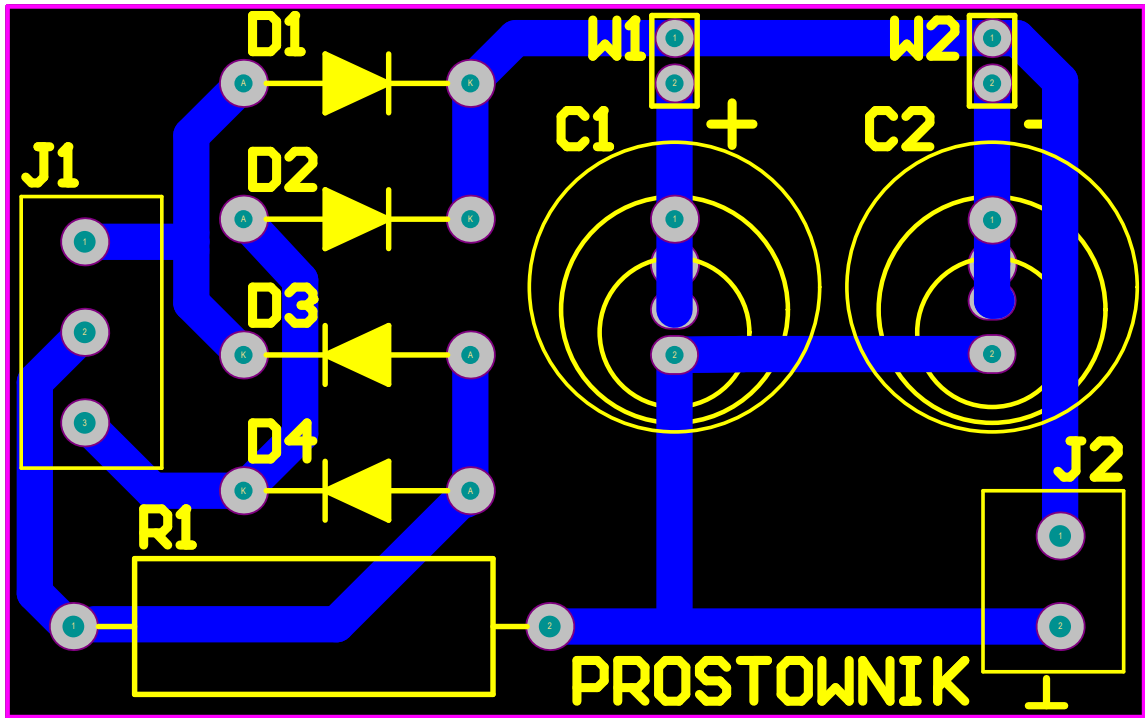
PCB of rectifiers. All of rectifiers described can be assembled on the PCB. Elements view.
